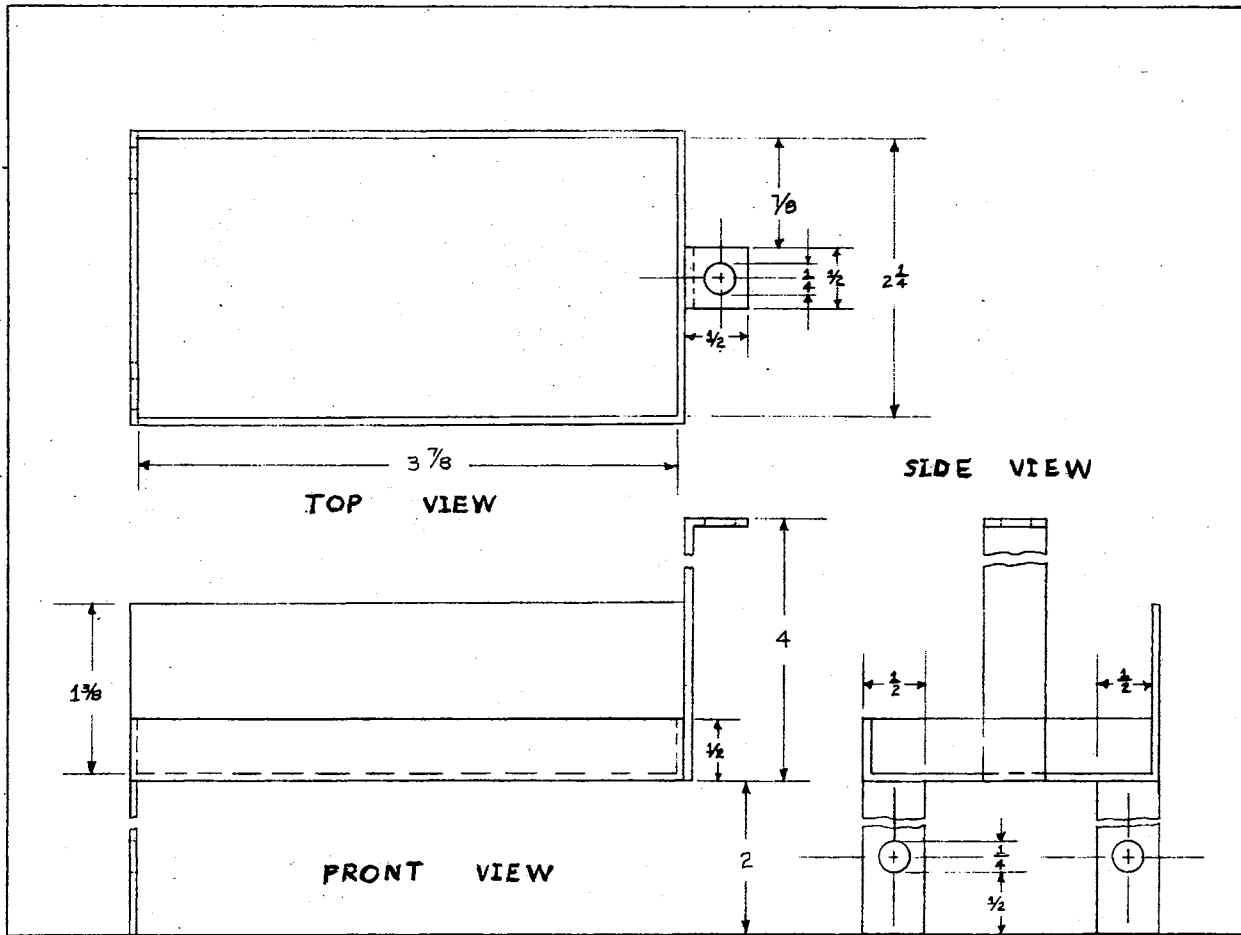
Detailed Dimensioned Drawing of the Major Part of the Installation Rack
